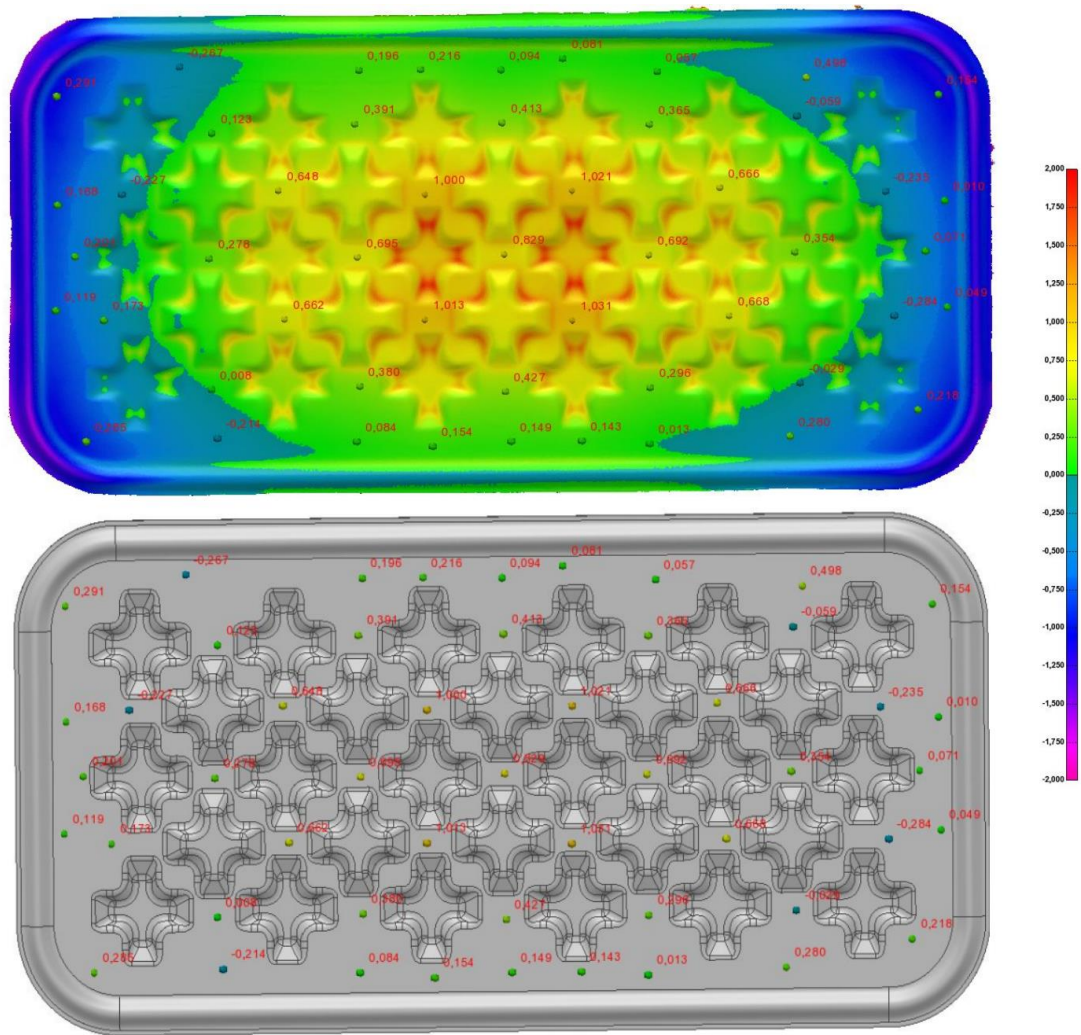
FARO laser scanner result of deformed sheet to investigate springback
